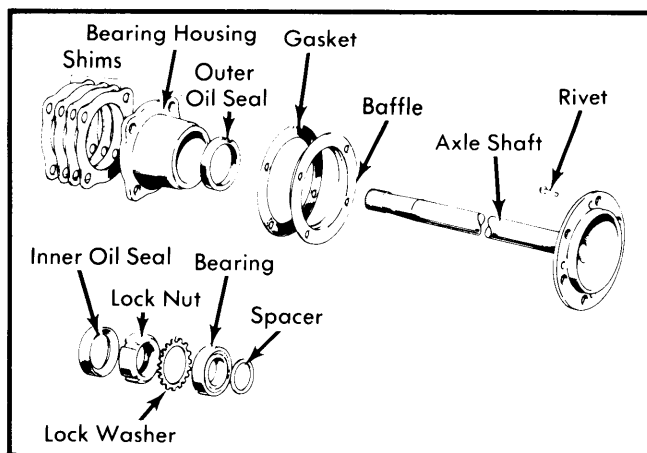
Exploded View of Pickup Axle Shaft Assembly
